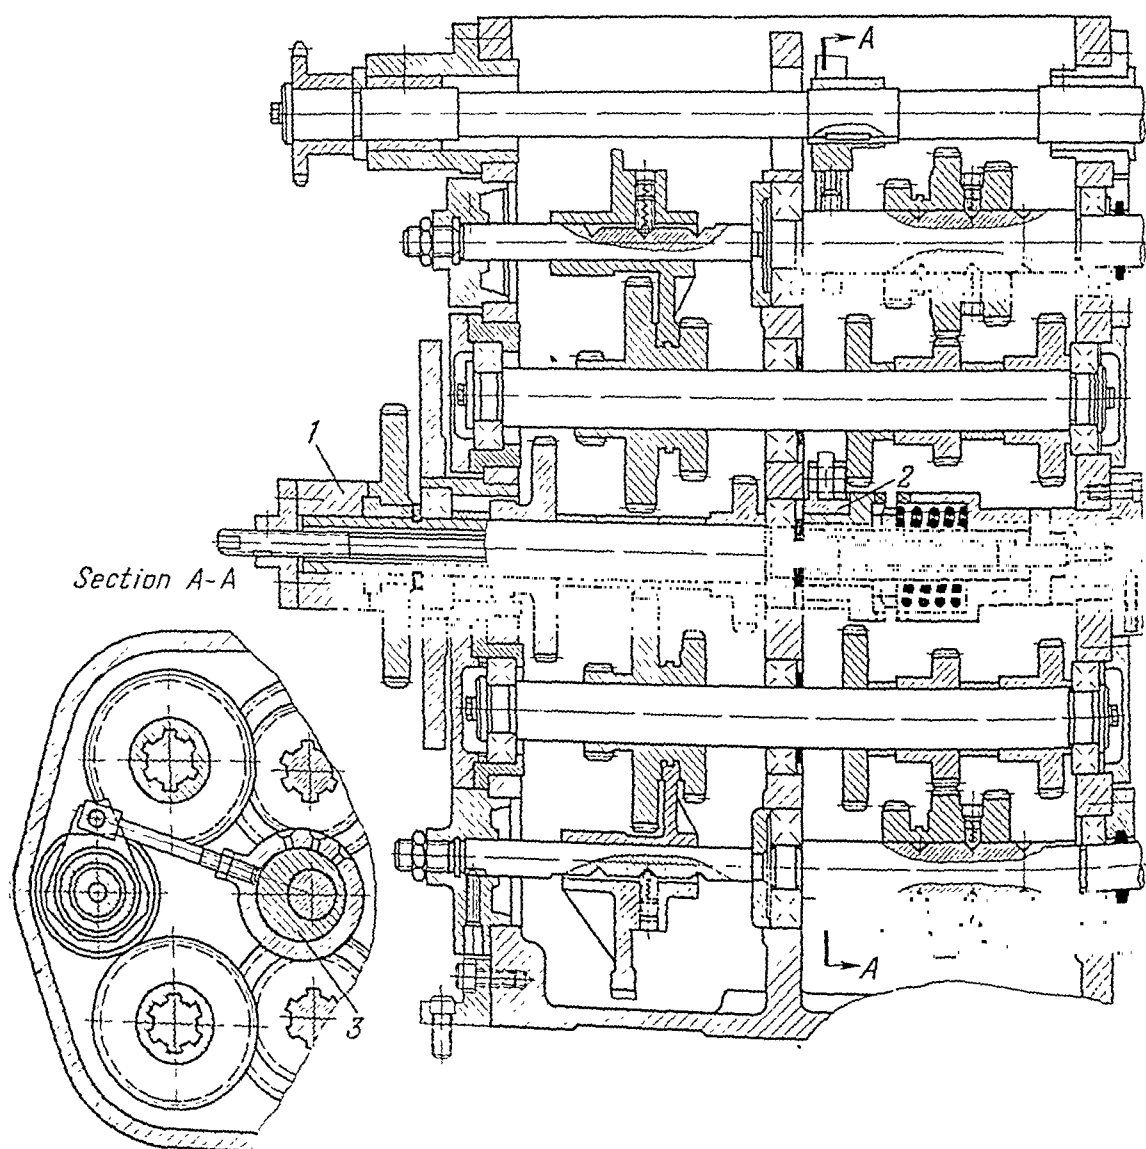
Feed gearbox of the model 1H365 turret lathe
